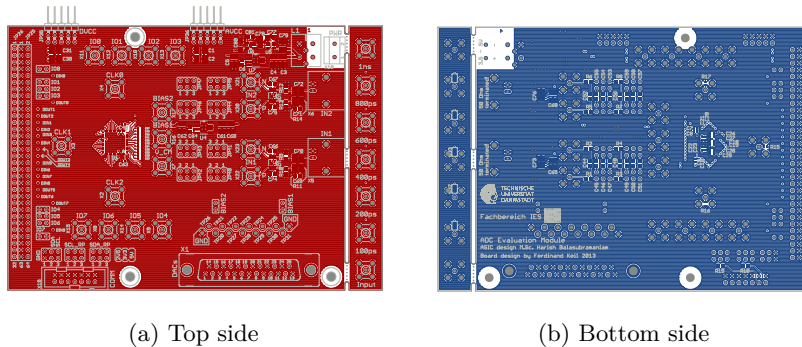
Main board PCB layout (inner layers were omitted for clarity).
